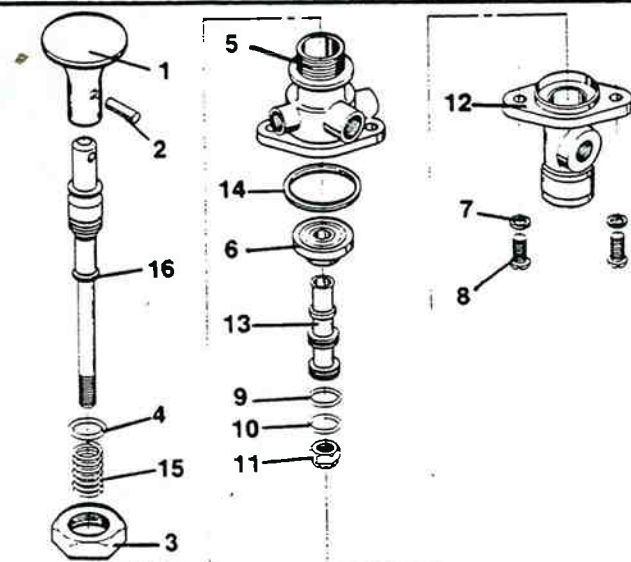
Push-Pull Control Valve Parts Breakdown.
